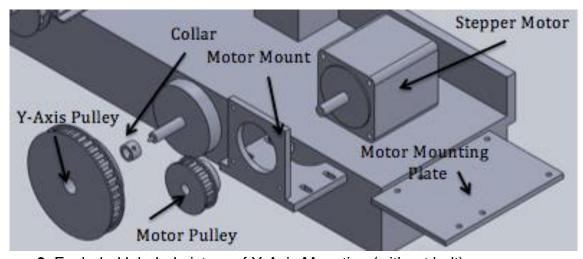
Exploded labeled picture of Y-Axis Mounting (without belt)
